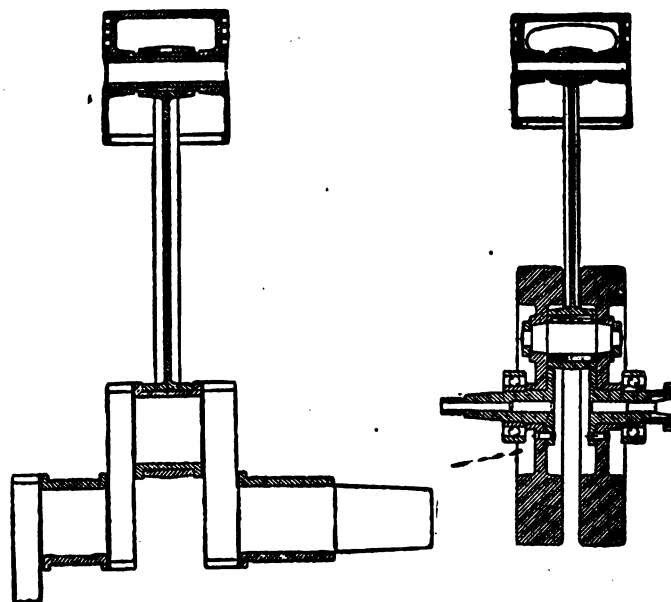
Section of crank, piston and connecting rod, 90 by 130 mm. touring car engine and 85 by 88 mm. motorcycle engine
